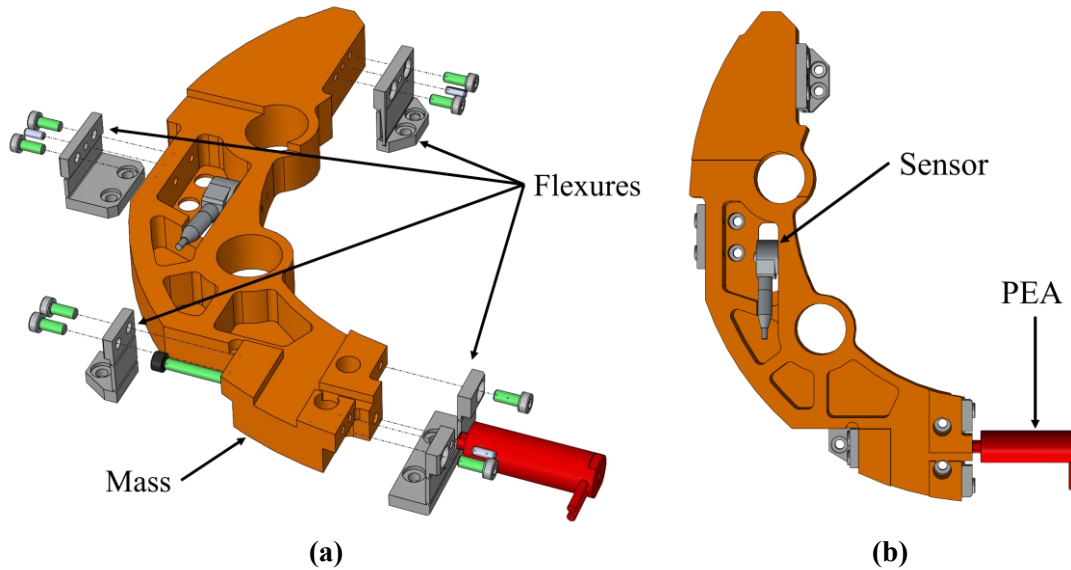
Spindle Device: (a) CAD Design, (b) Uncovered Prototype
